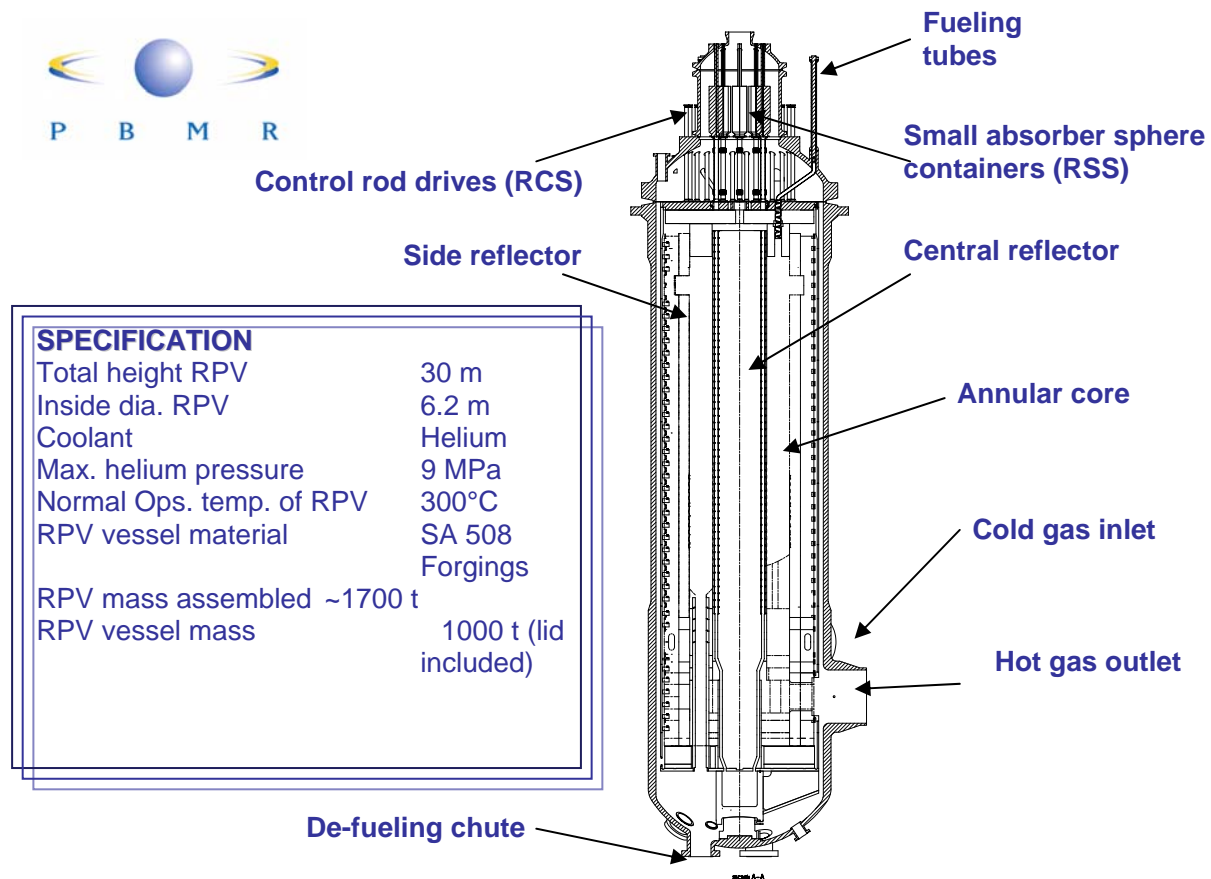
PBMR Reactor Unit – Vessel Assembly
